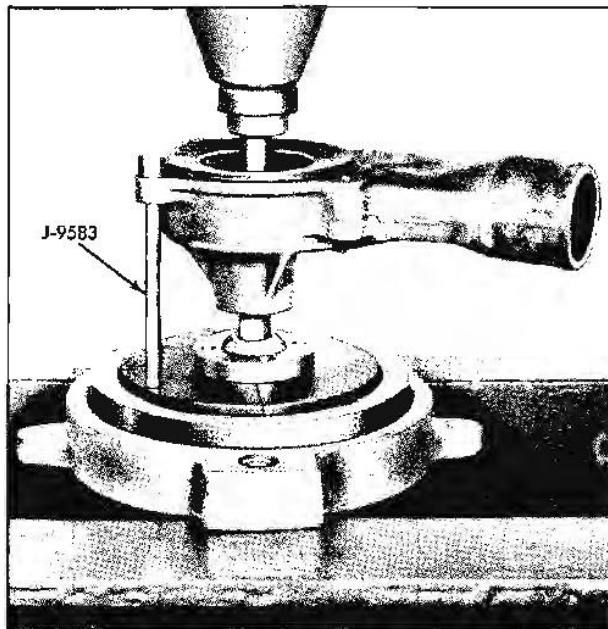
A-25 Installing Fan Hub Using Locating Tool J-9583
